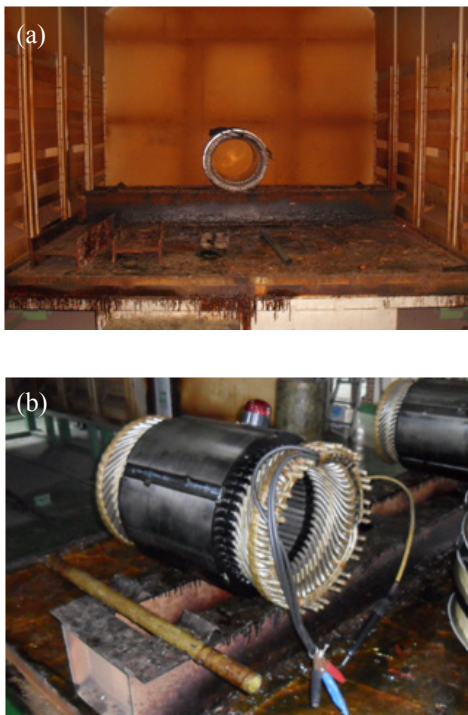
Heating dry of HV motor stator windings. (a) Heating dry, (b) HV motor stator windings.
